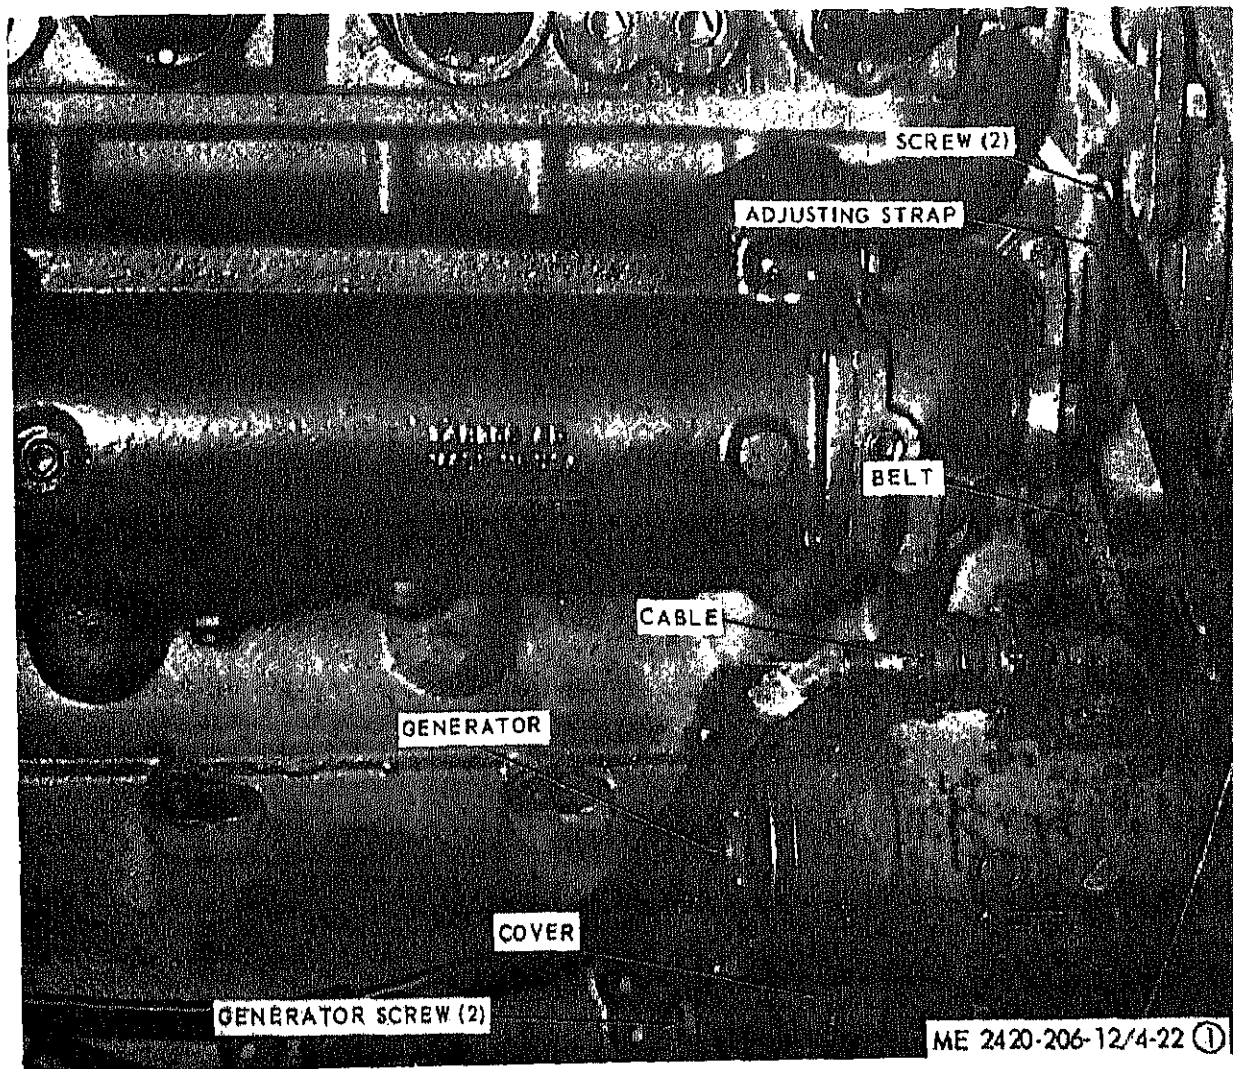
Generator repair, removal and installation (sheet 1 of 2).
